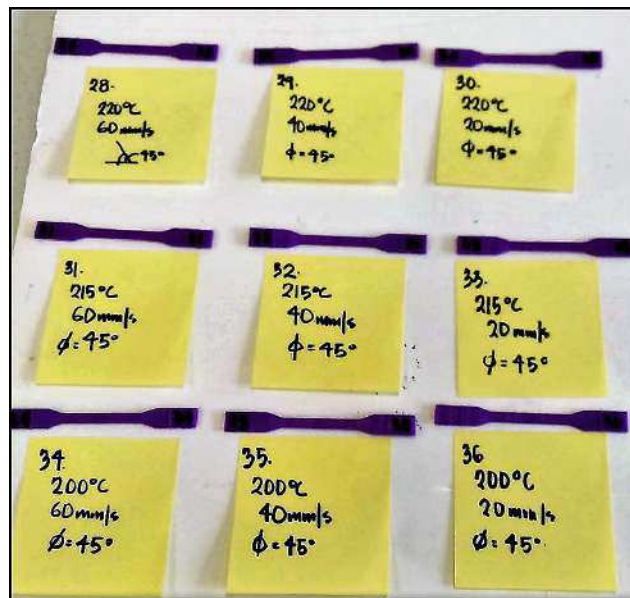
Specimen A28 to A36 prior to evaluation on the Q-test machine.
